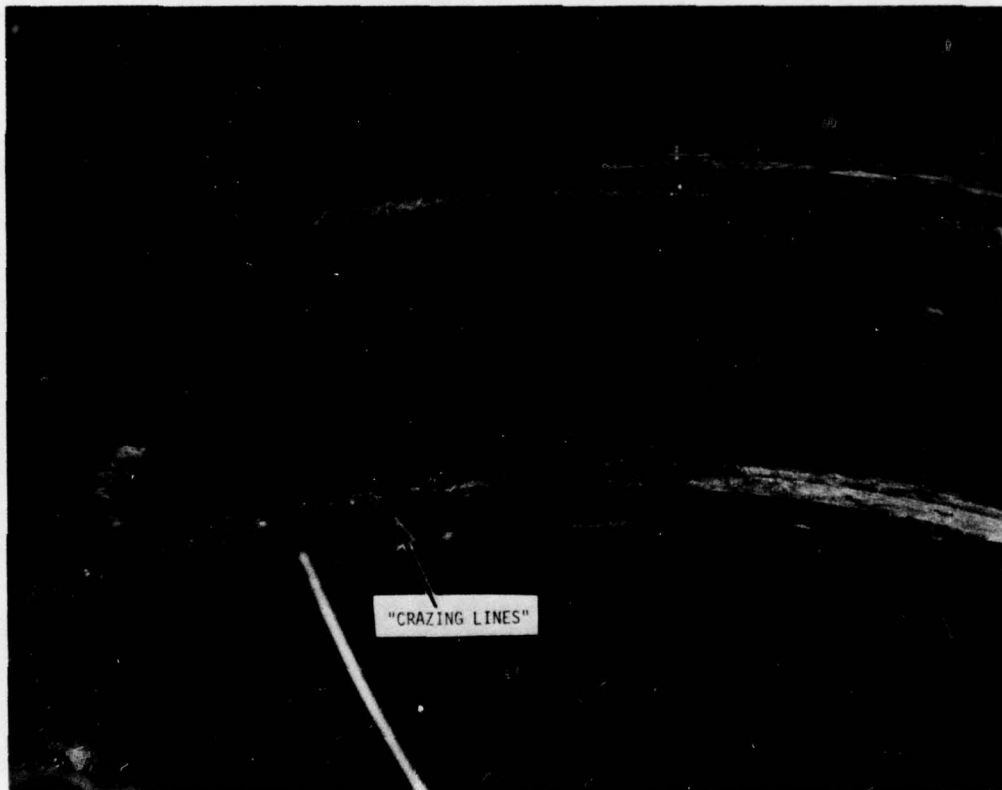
Apparent "Crazing" Lines on the Outer Flange of the Wheel
